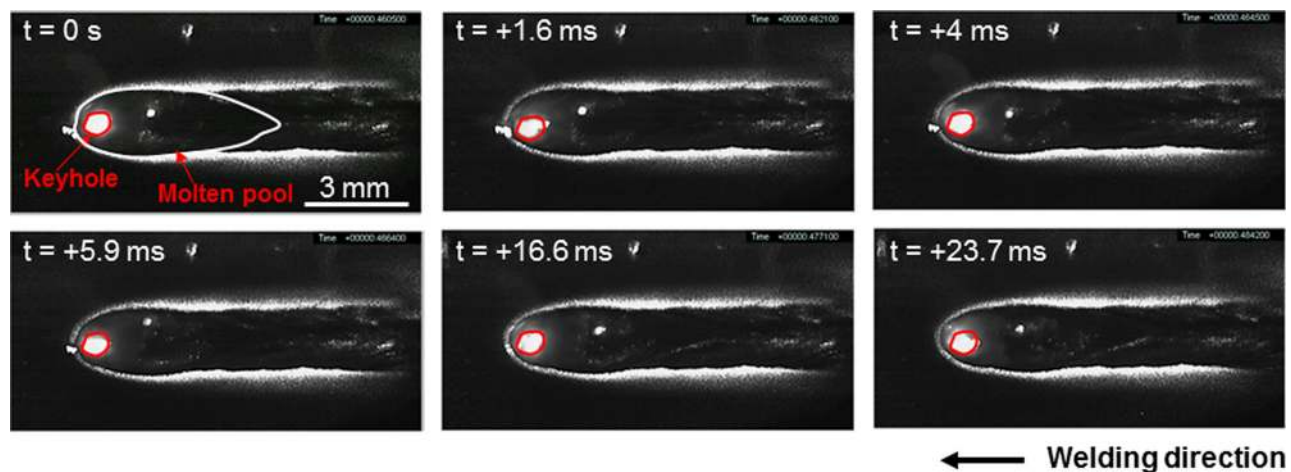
High-speed video images of the molten pool during high-power fiber laser welding of a high-strength steel using optics system B (4 mm focus depth), showing stable melt flow in the molten pool.
